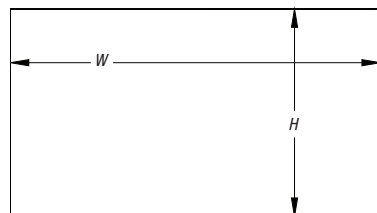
Dimensions of unsupported plate located between the stiffeners or adjacent plate
